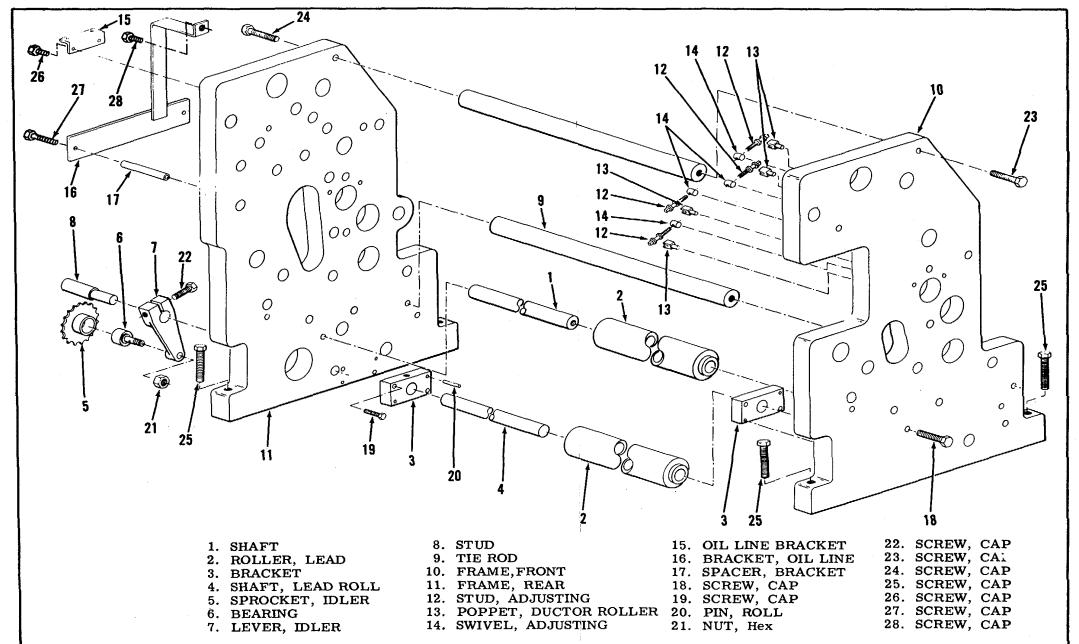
Lead Roller, Idler Sprocket and Unit Frame Assembly, Exploded View.
